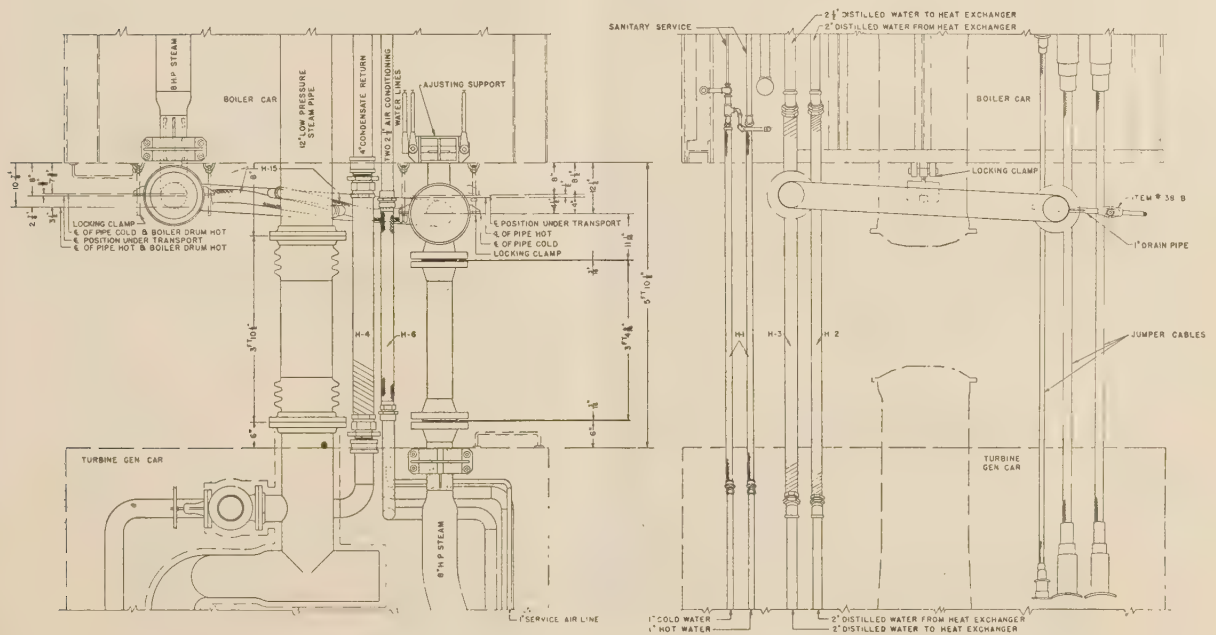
PLAN VIEW OF CONNECTIONS BETWEEN TURBINE AND BOILER CARS
